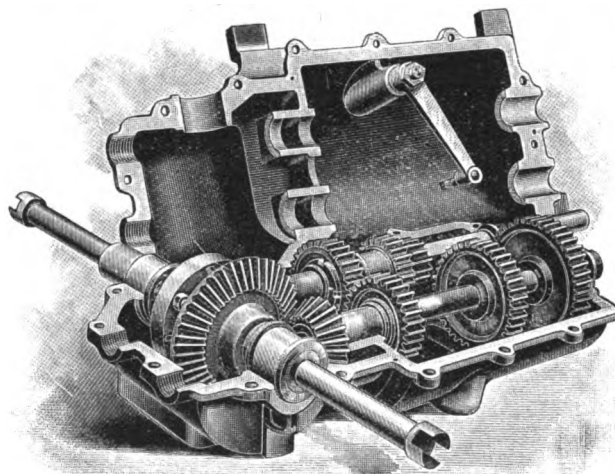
THE ASTER CHANGE-SPEED GEAR.
